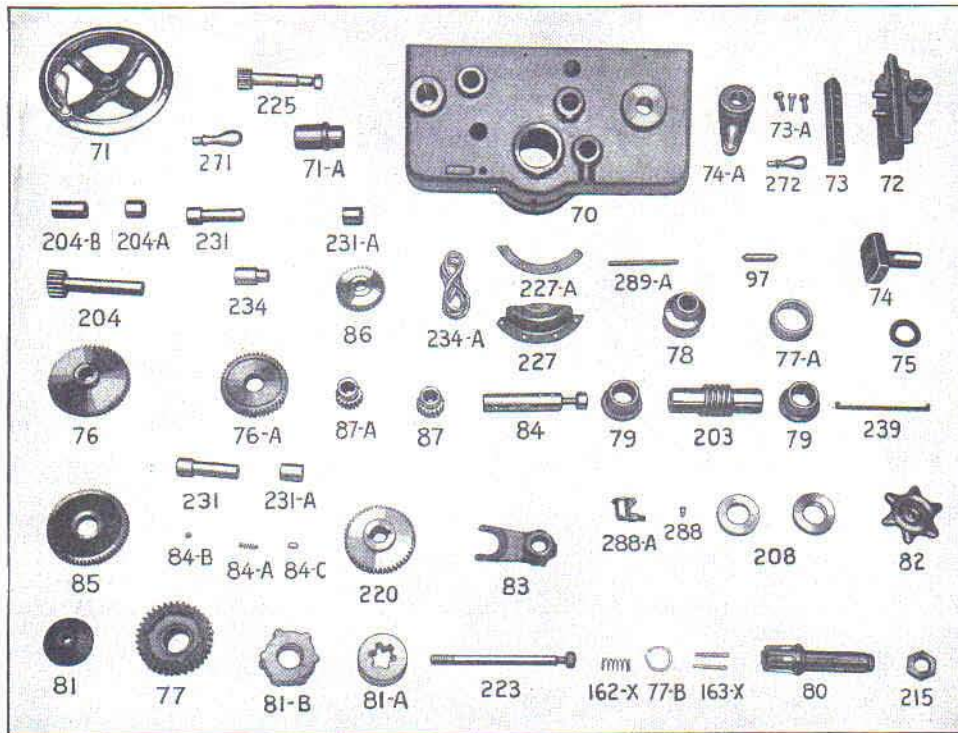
Apron Parts for Series "N" Quick Change Gear and Standard Change Gear Lathes.
